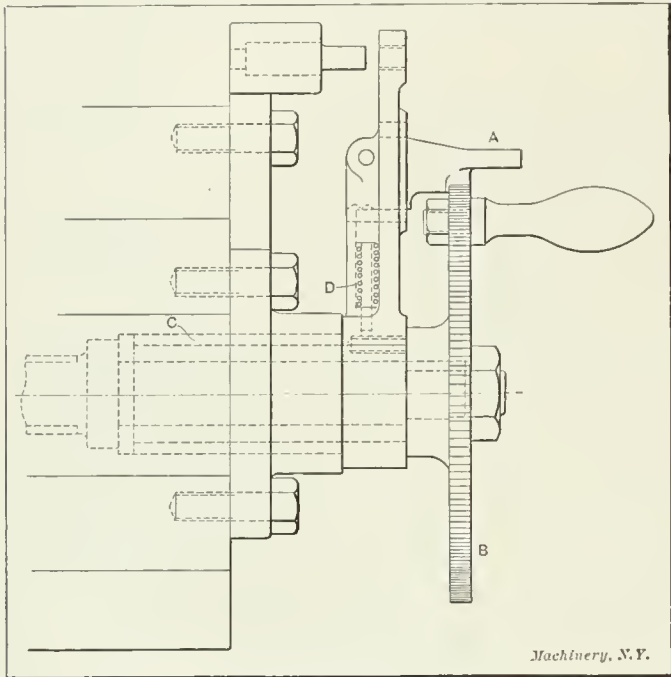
Locking Arrangement for Quick Withdrawal Device on Threading Lathe
